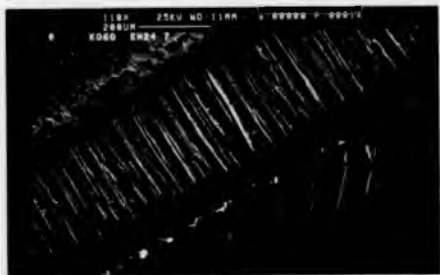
Typical crater wear after machining EN24 with pure oxide ceramic tools (KO60)
